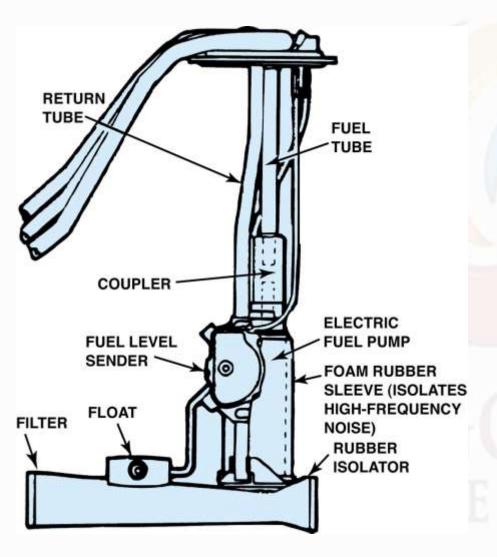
The fuel pickup tube is part of the fuel sender and pump assembly.
